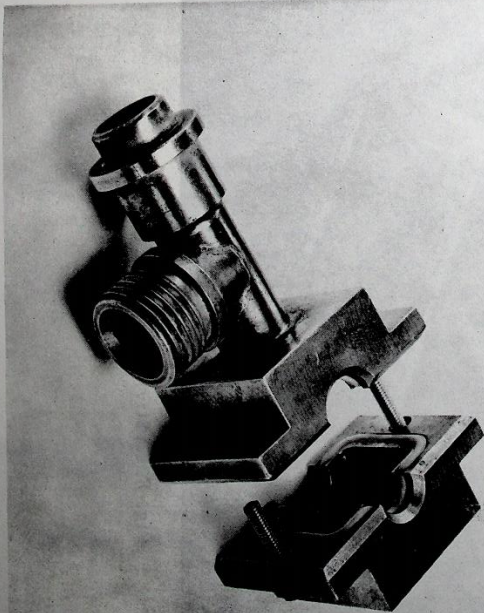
(ii) O-ring corner joint of the linac vacuum vessel
